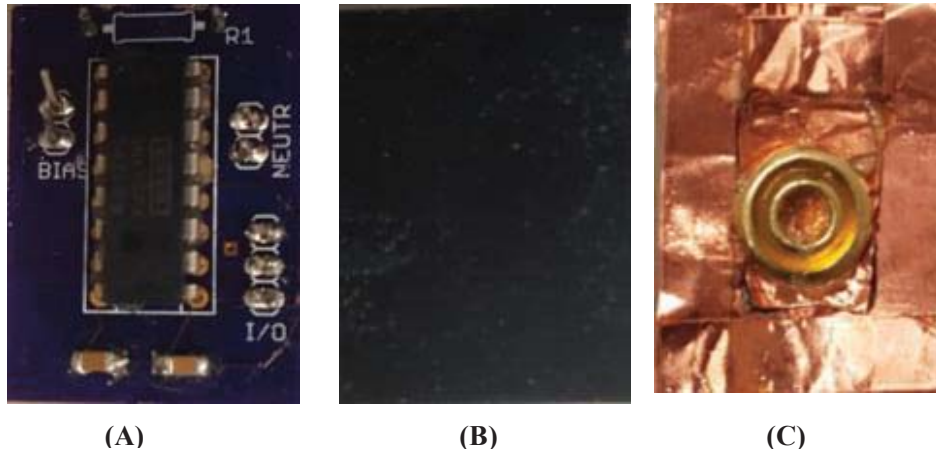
Fabrication of the electrode test module. (A) Soldering of the in-amp, bypass capacitors, and headers to the PCB. (B) Adhering the printed rubber composite to the PCB. (C) Adhering the 3M copper tape and snap to the module.
